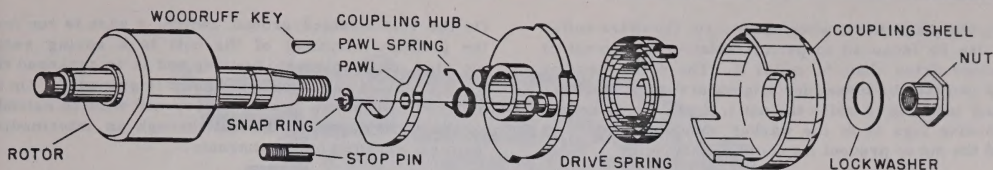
Magnetic Rotor and Disassembled Impulse Coupling
